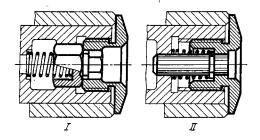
Nuts fixed by spring-loaded locking devices *I*—nuts with hexagon socket; *II*—nuts with serrated socket
